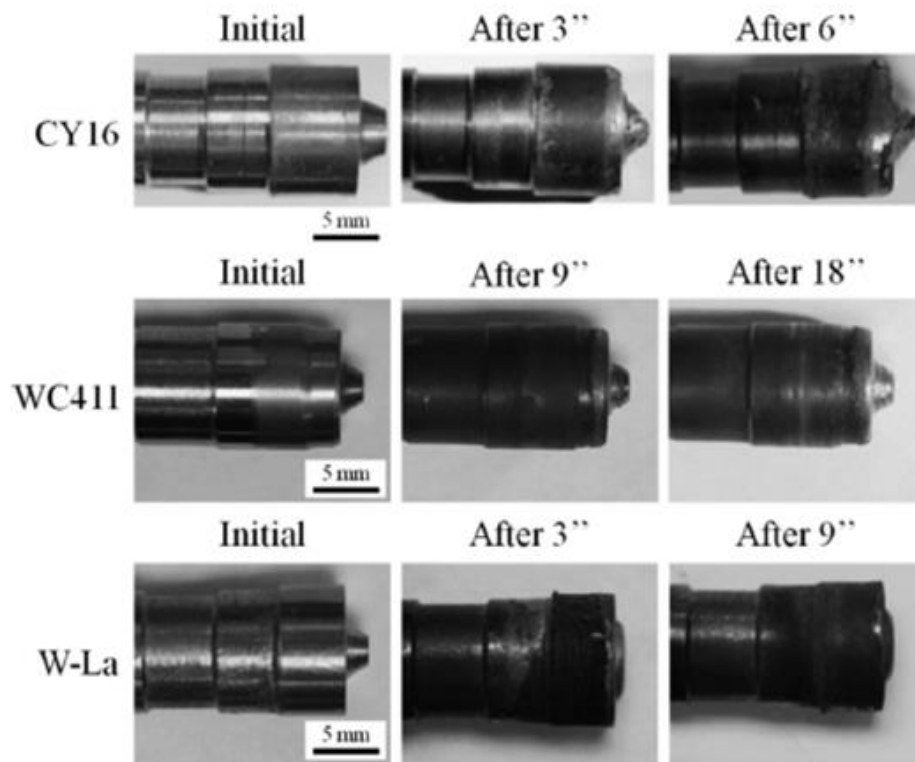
Tool geometries at different welding lengths. Note that the total length of accumulative welds is different for the three different tools (length in inches) [87].
